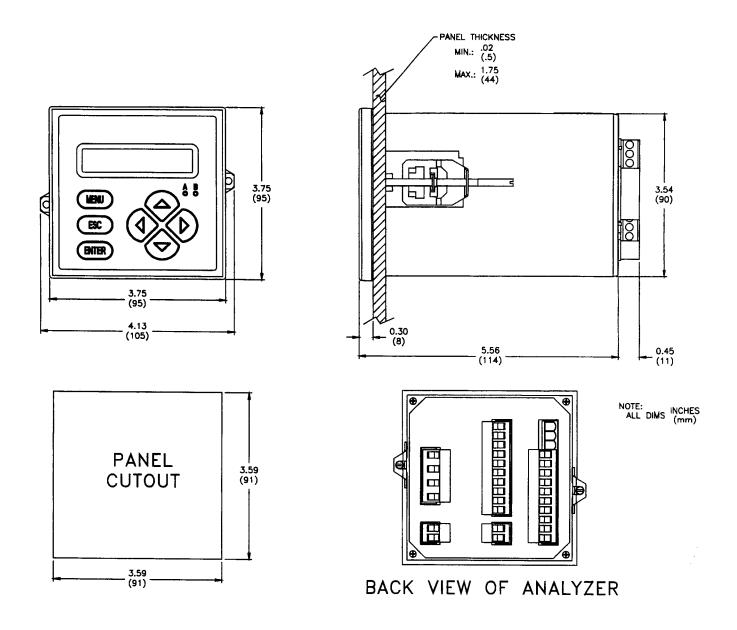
Analyzer Enclosure Dimensions and Panel Mounting Details
